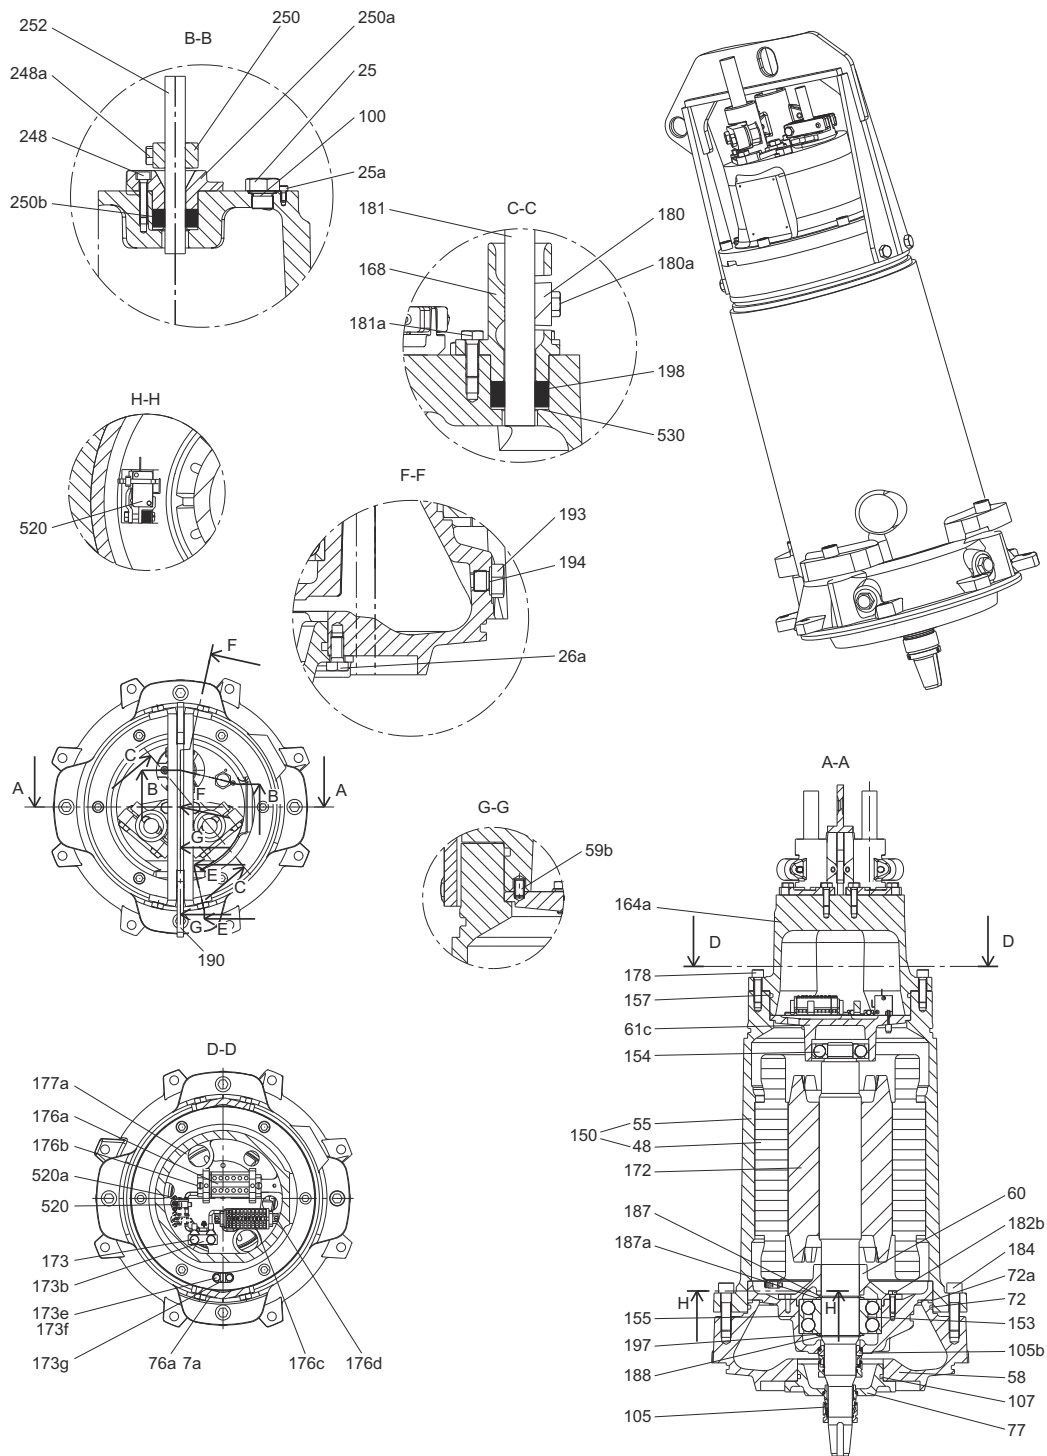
Explosion-proof motor without cooling jacket (installation type S)
